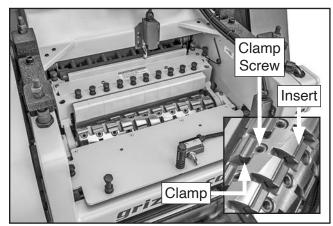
Location of upper cutterhead inserts, clamps, and clamp screws.
